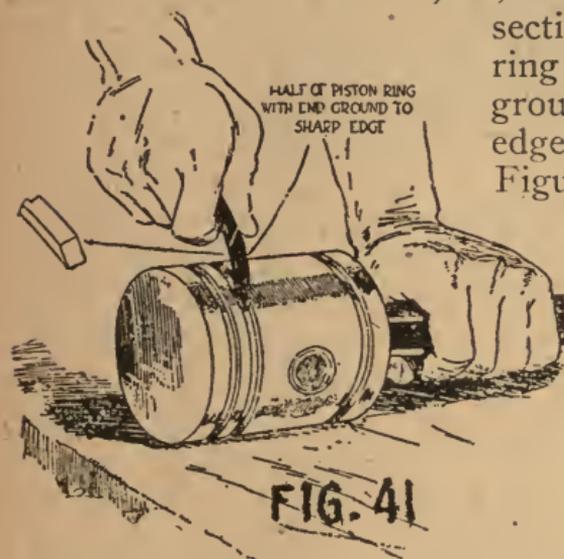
Cleaning ring grooves with sharpened section of broken ring.
